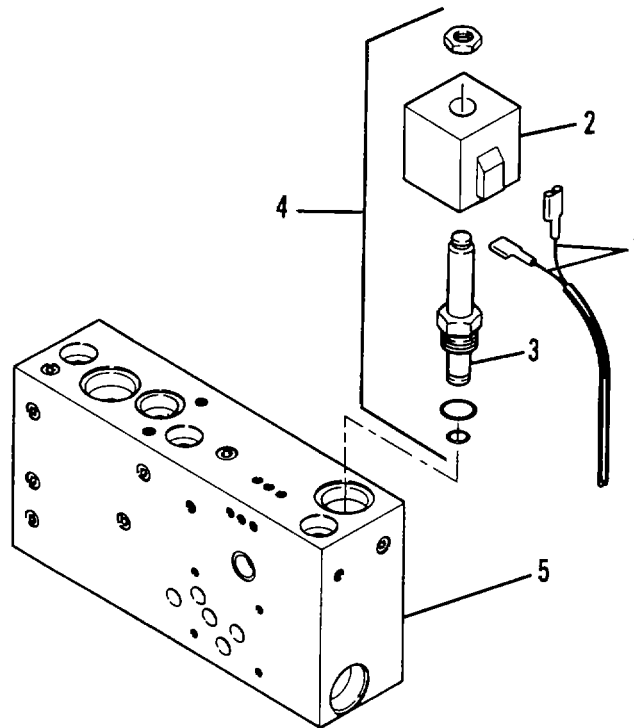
Solenoid Valve/Cartridge Assembly (Sheet 2 of 2).
